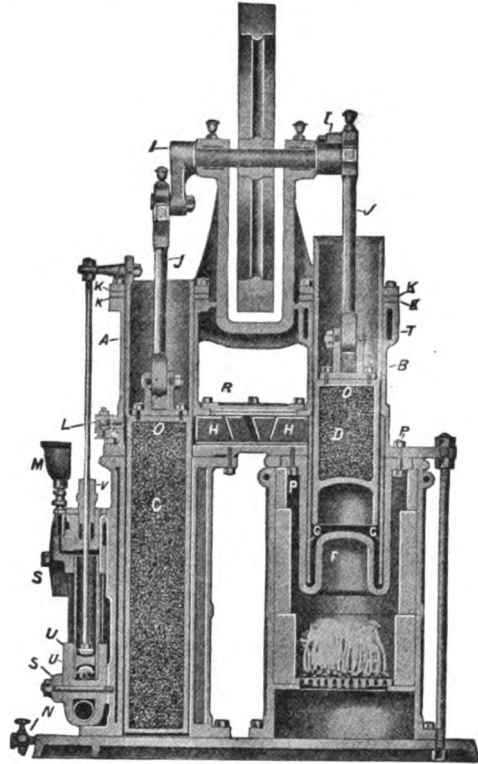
Rider hot-air engine.—A, compression cylinder; B, power cylinder; C, compression piston; D, power piston; E, cooler; F, heater; G, telescope; H, regenerator; I, I, cranks; J, J, connecting rods; K, K, piston packings (leather); L, check valve, placed at back of compression cylinder, but shown at side on cut; M, pump primer; N, blow-off cock; O, O, knuckles; P, P, heater bolts; R, regenerator bonnet; S, S, pump valve bonnet; T, water-jacket to protect packing from heat; U, U, pump buckets; V, pump gland.
